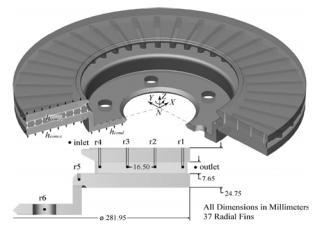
Brake rotor geometry and thermocouple placement [62].
